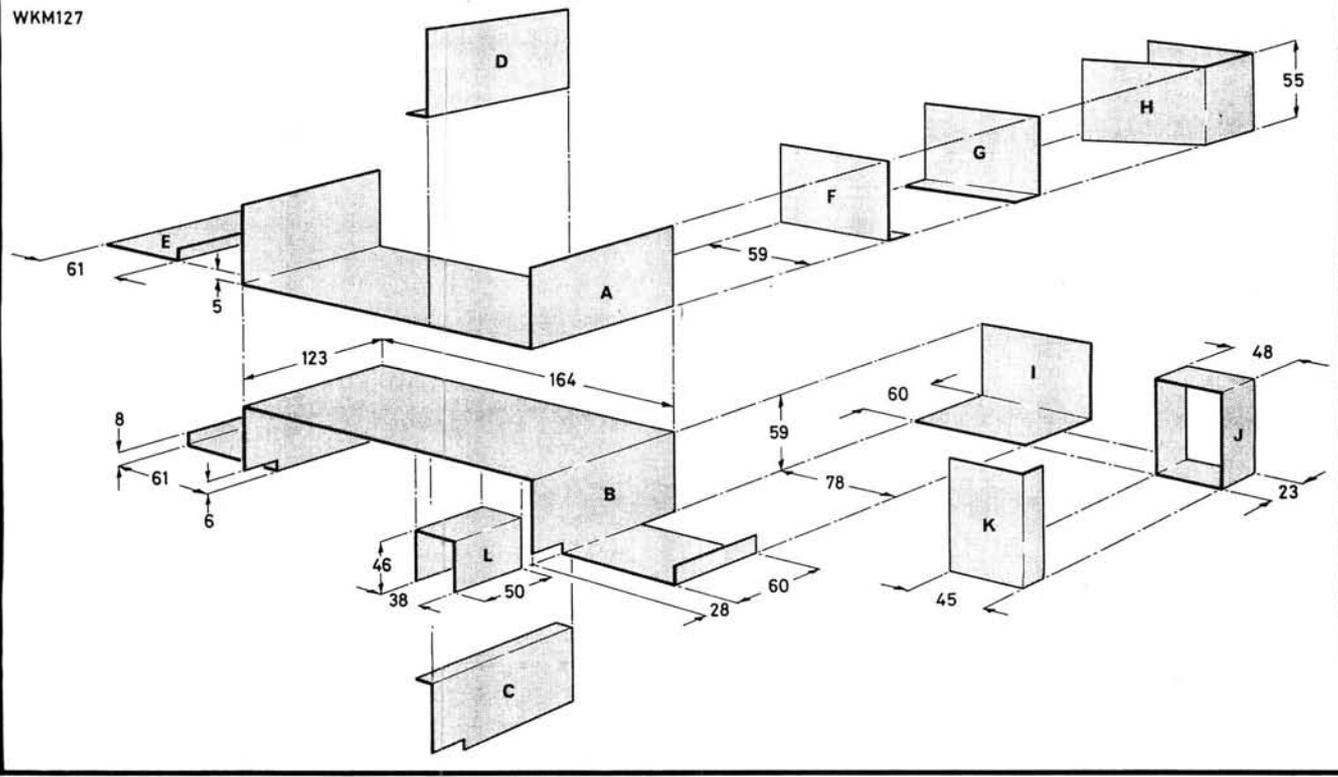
(below): Exploded view of the various component parts of the *PW Helford* metalwork. These are made from 18 s.w.g. aluminium sheet. Parts H and L are the heatsinks for the two bias regulators
